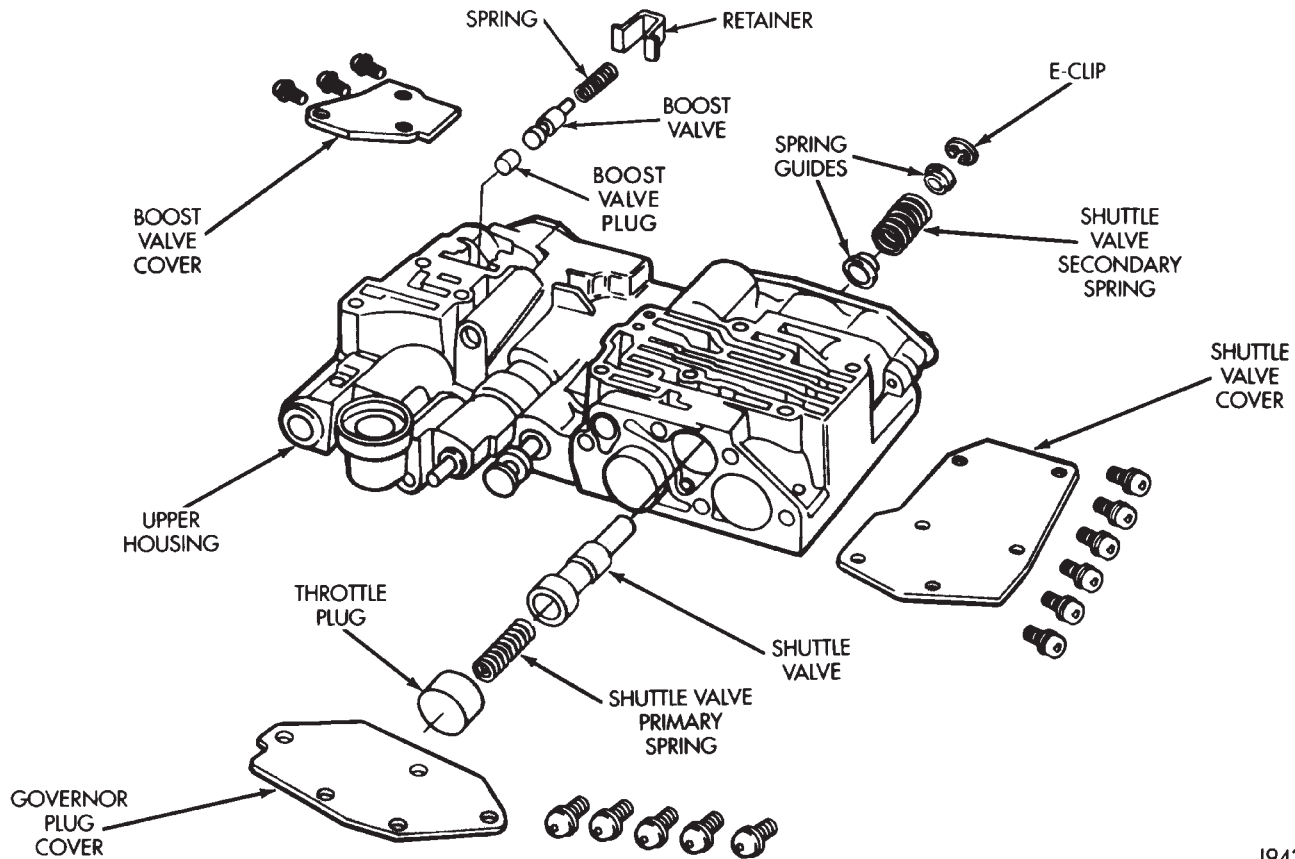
Shuttle Valve E-Clip And Secondary Spring Location
